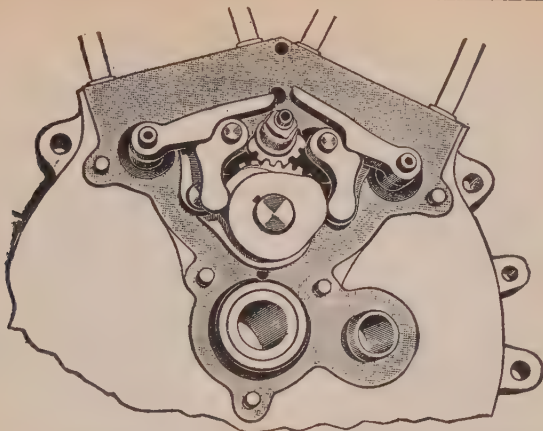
Valve gear of the Indian motor cycle. As shown in the illustration, the inlet valve of the front cylinder is about to close, while the exhaust valve of the rear cylinder has just opened. It will be seen that the revolving cam acts on the end of a cam lever, while the cam upon the lever lifts a second lever, or finger, upon which the lower end of the inlet valve operating rod rests. The exhaust valve is operated in the same way, but the levers are of slightly different form, and the end of the cam lever is provided with a steel roller to lessen the friction with the revolving cam, as the power required to operate the exhaust valve is greater than that required for the inlet valve.
